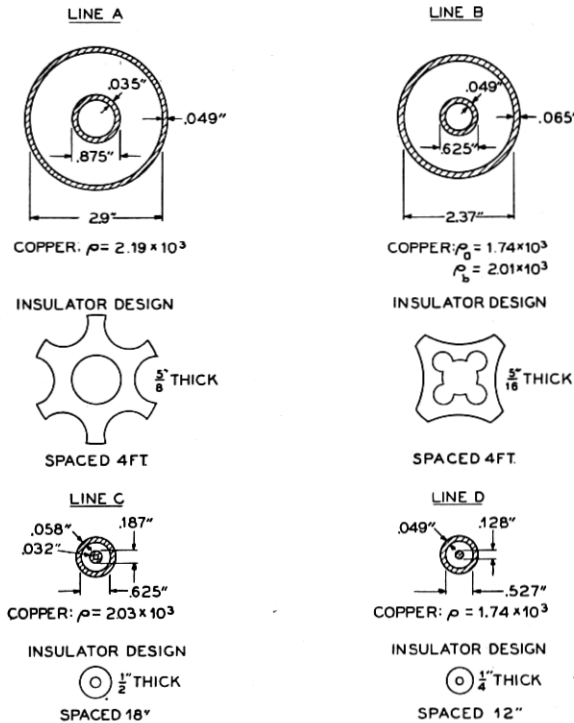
Principal dimensions of the concentric tube lines upon which the experimental resistance measurements shown in Fig. 2 were made.
